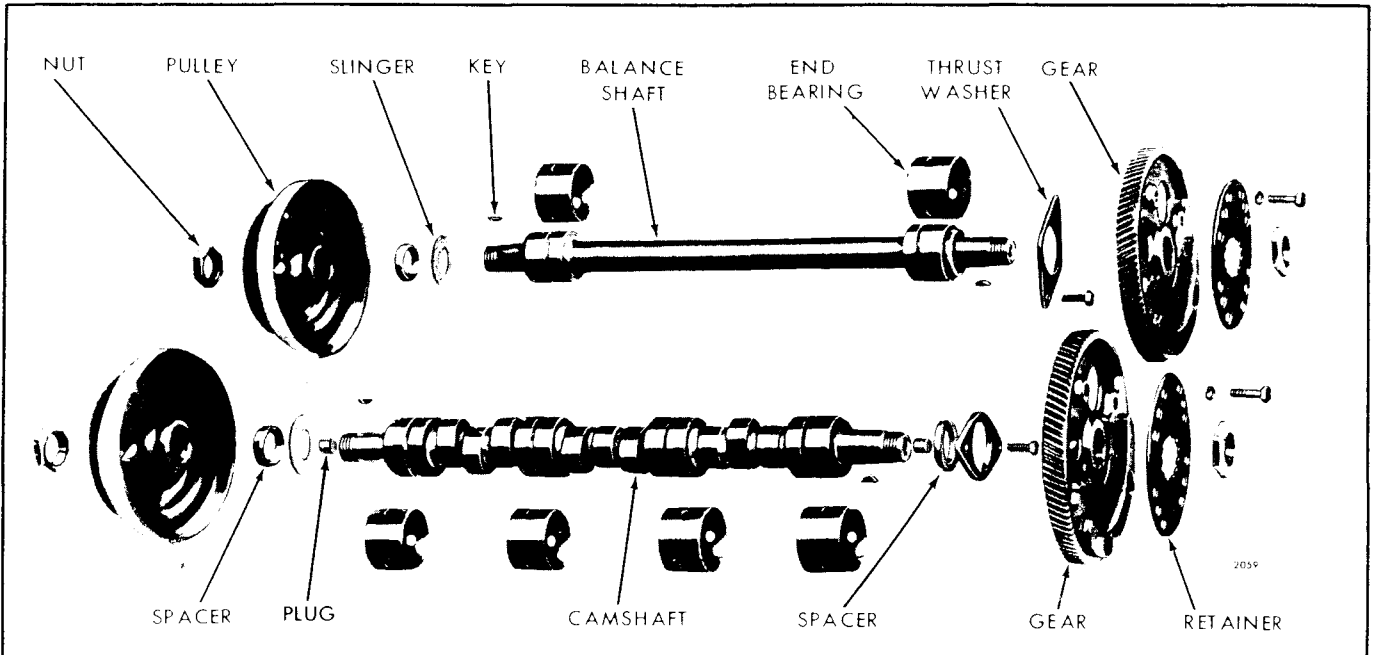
Camshaft and Balance Shaft Details and Relative Location of Parts
